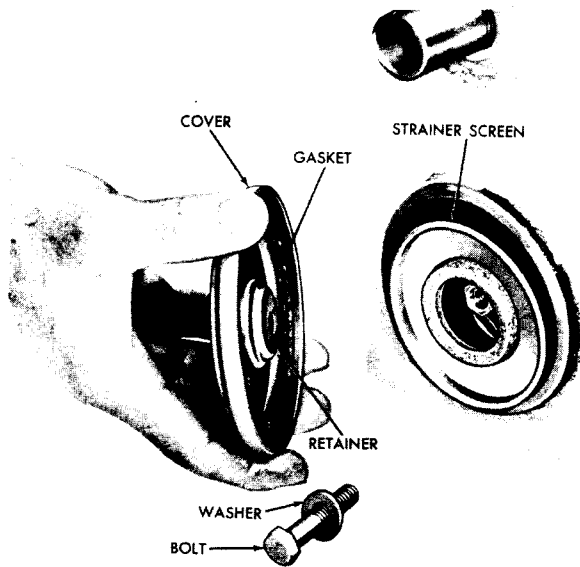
Installing (or removing) oil strainer components in welded housing ^{S2439}
